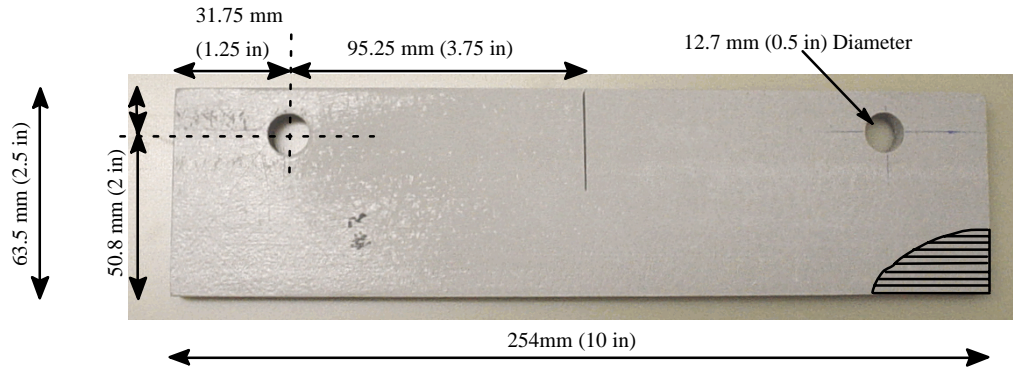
Geometry of tested ESE(T) fracture specimen
